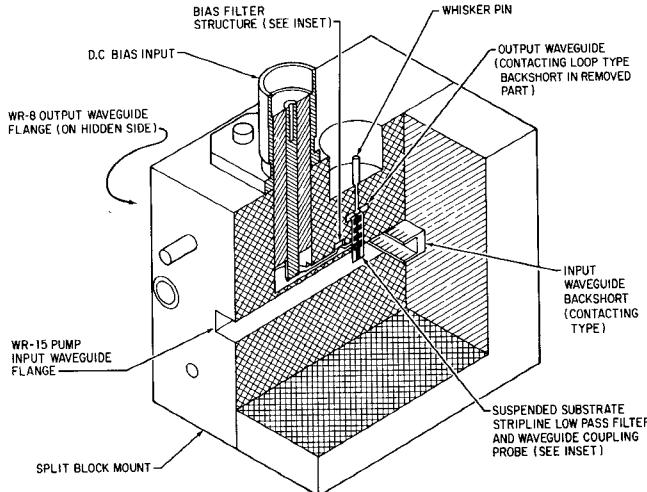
An isometric drawing and sketch showing the main features of the single-diode doubler design and details of the varactor mounting and biasing structure. Dimensions are in millimeters.
